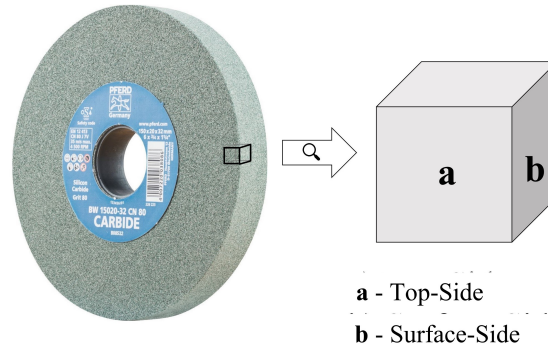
Grinding wheel cut-out used for simulation [105]
